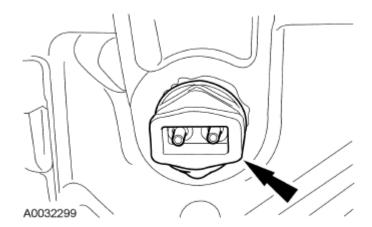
Locating Block Heater Courtesy of FORD MOTOR CO.
